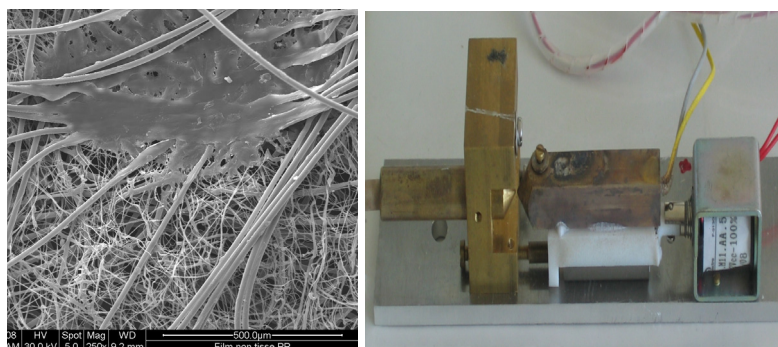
a) Scanning electron micrograph of a welding spot in a nonwoven fabric of isotactic polypropylene (left), home-made welding machine (right).
